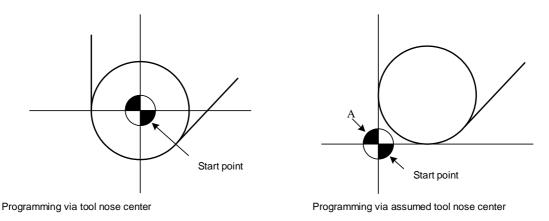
Tool Nose Radius Center and Assumed Tool Nose
